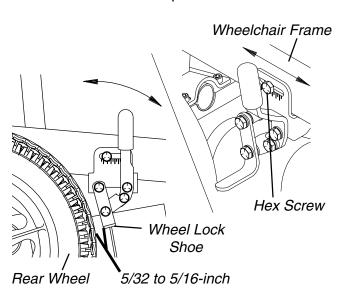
INSTALLING/ADJUSTING WHEEL LOCKS
